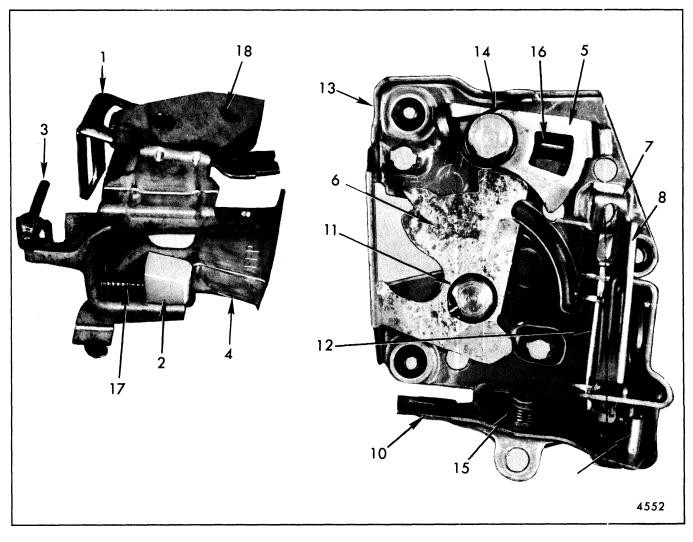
Rear Door Lock Assembly - "A, B and C" Styles
